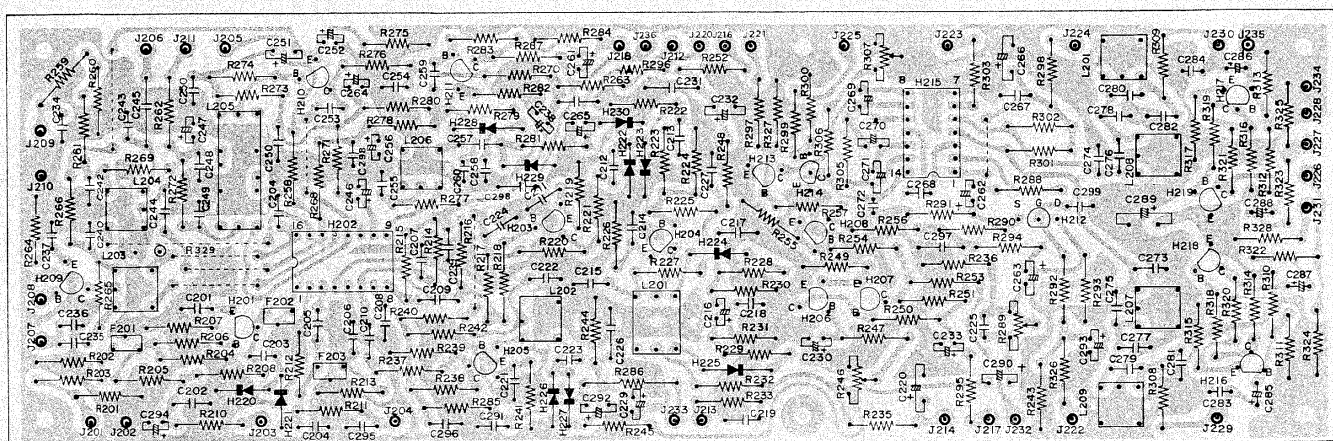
FM/AM Tuner Assembly P200 Component Locations
